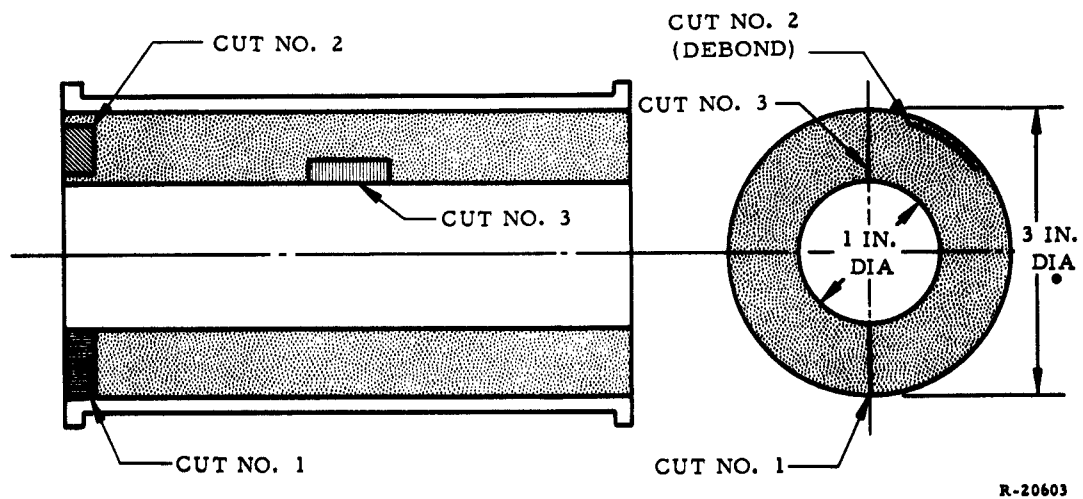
Propellant Cracks and Unbonds - Motor Defects
